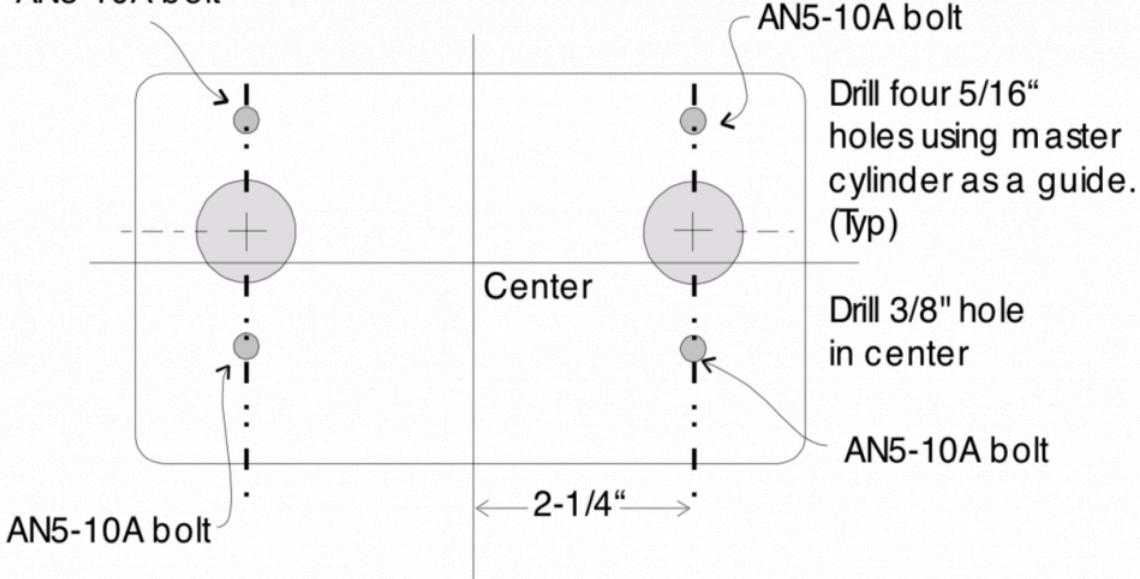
Master Cylinder Mounting Locations on Brake Box
